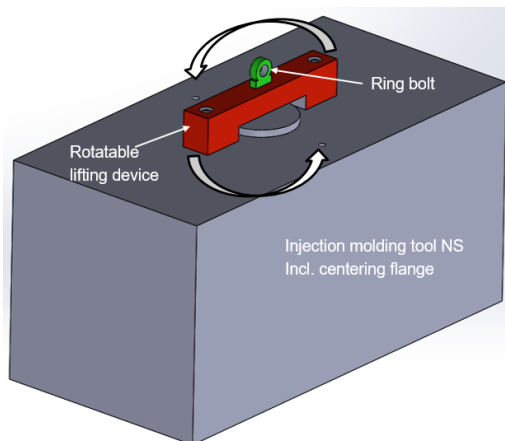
Schematic figure of a lifting device for the mold nozzle side
